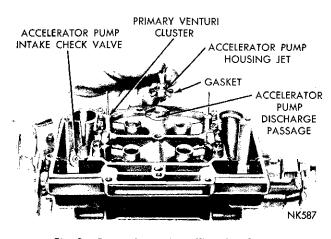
Removing or Installing Accelerator Pump Jet Housing
